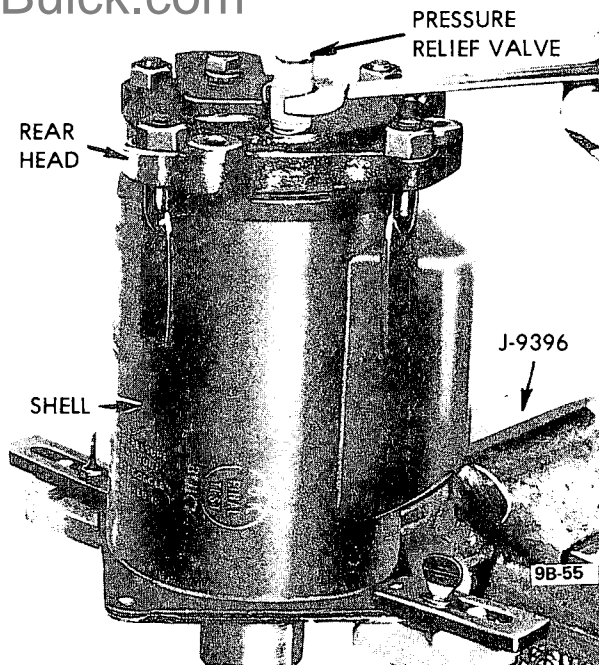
B-80 Compressor Installed in Holding Fixture - 6 Cylinder Compressor
